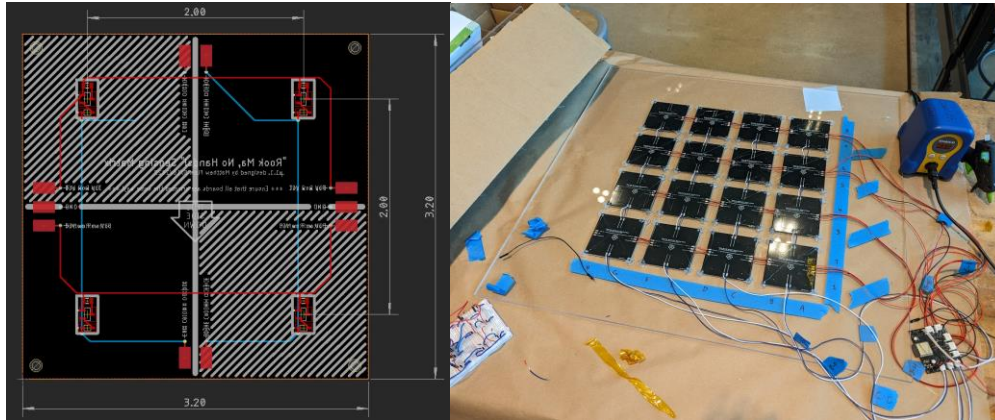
Sensor matrix PCB layout (left) and assembled sensor matrix (right)
